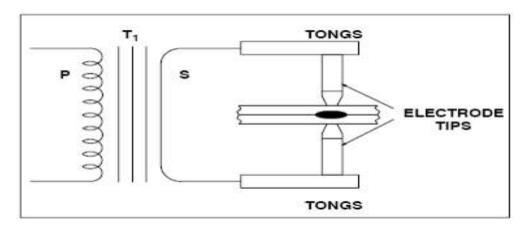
Resistance Spot Welding Machine with Work.
